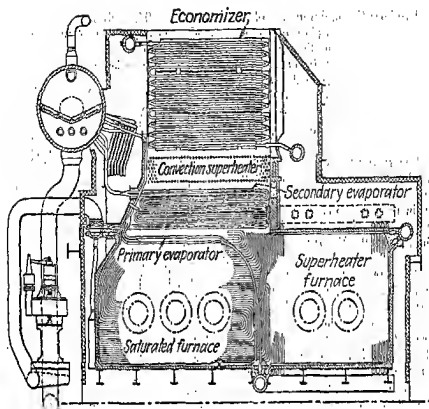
Cross section of recent Combustion Engineering controlled forced-circulation boiler, operating on principle shown in Fig. 14.
